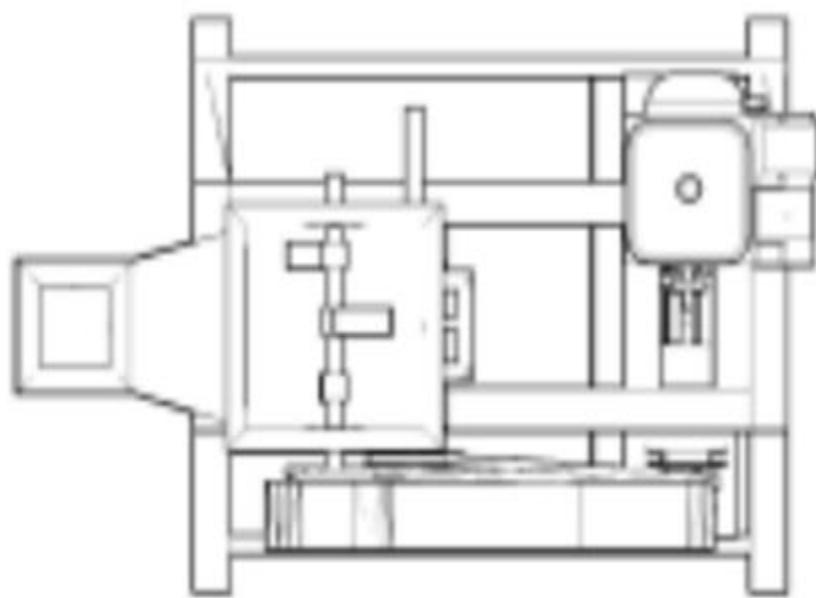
The Plan View drawing of Kokoro Pasta Extruder
